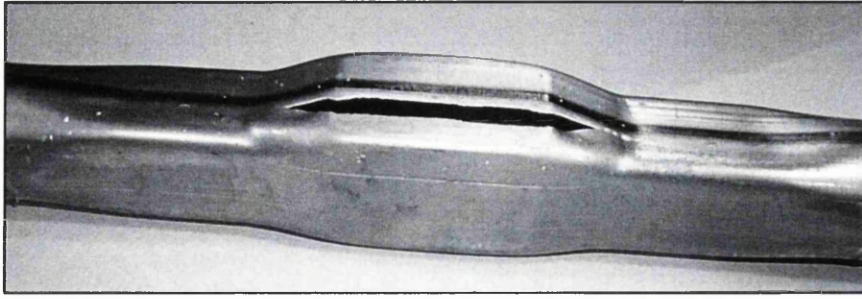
Photograph showing lubricated FeP04 tube, which burst at 760Bar
